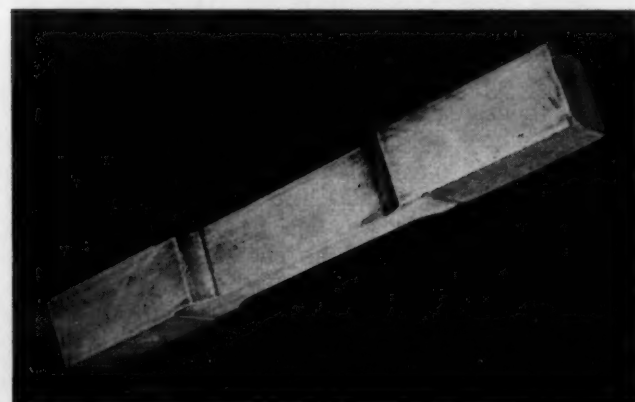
Illustration of test piece machined from cast and pressed blanks.
